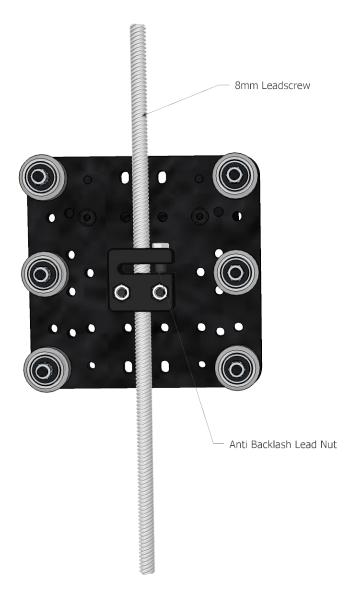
Assemble Z Axis Gantry Plate: Install Lead Screw
